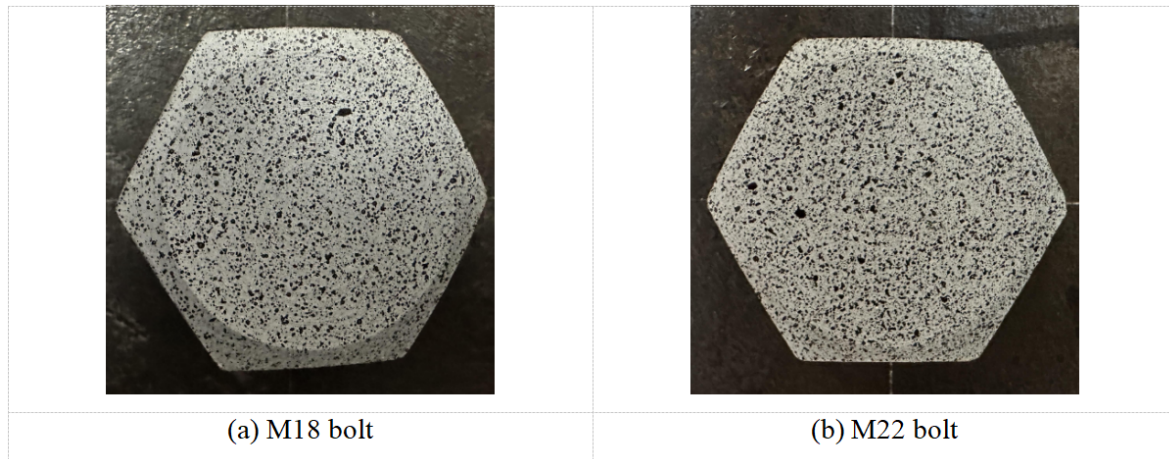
Speckle patterns on the bolt head surfaces of the M18 and M22 bolts.
